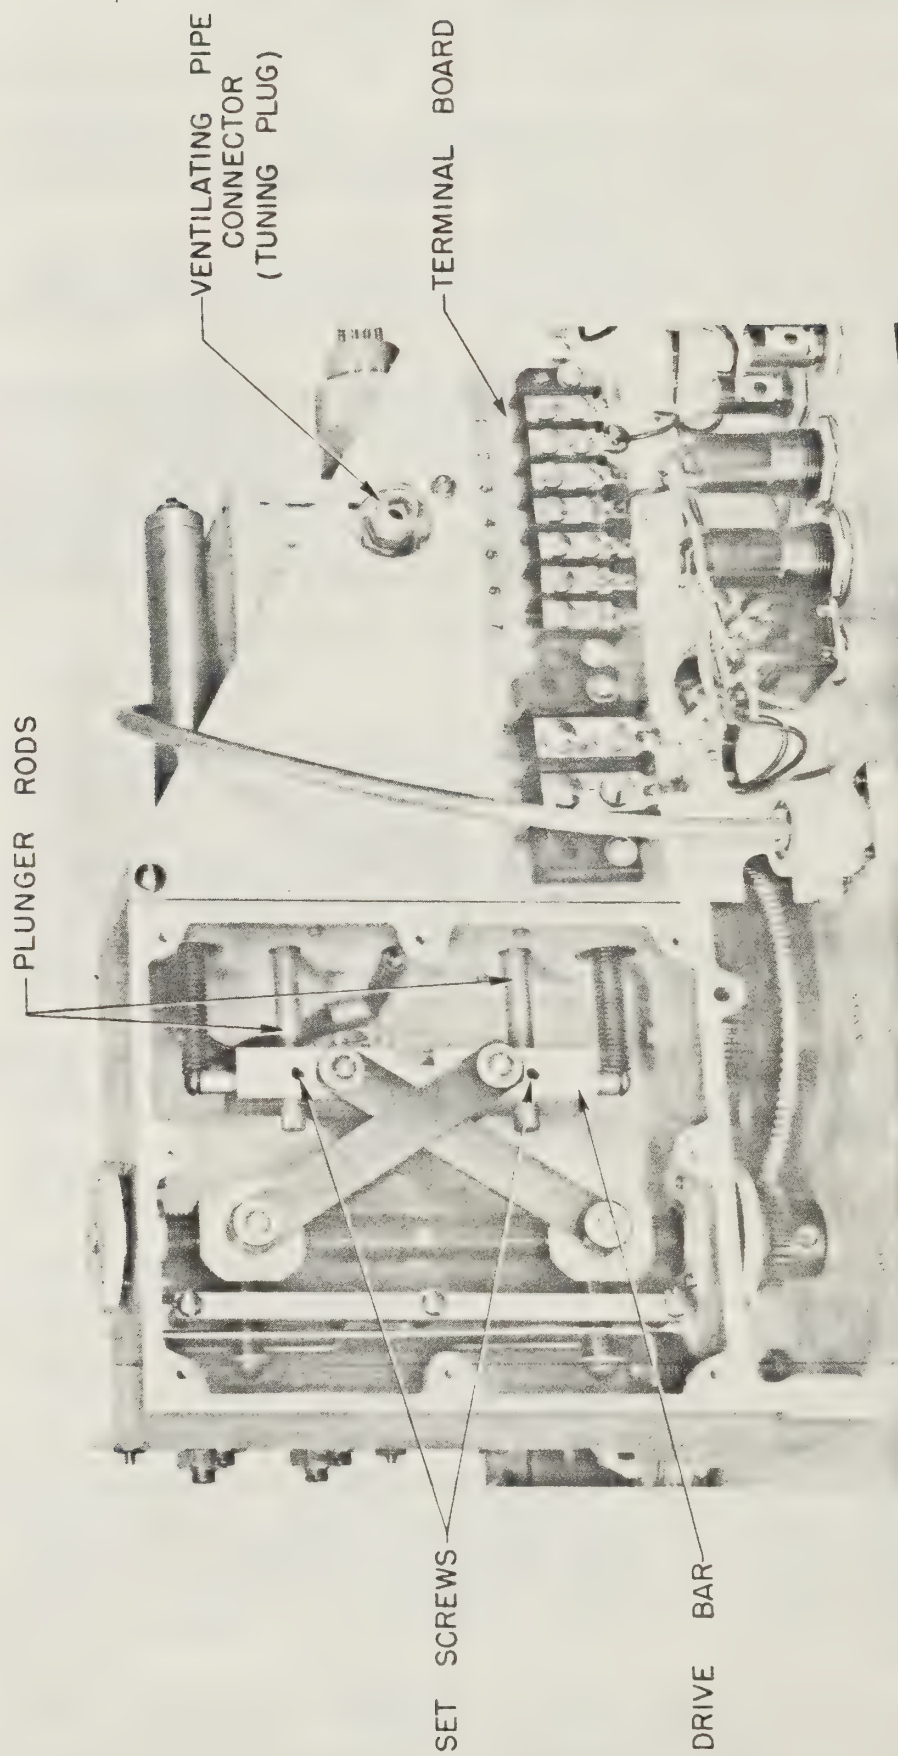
FREQUENCY DRIVE ASSEMBLY, BOTTOM VIEW
